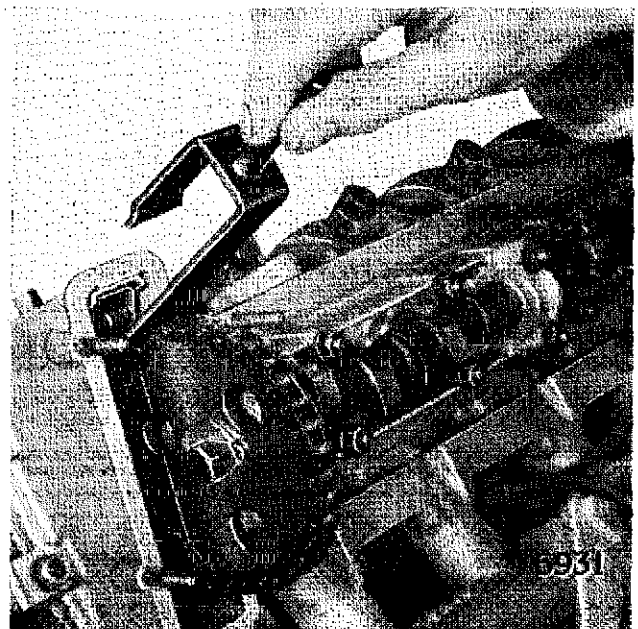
Inserting camshaft chain tensioner compressing tool RG354.
